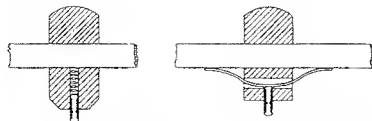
Sections of Two Sliders of a Better Type. In these the rounded end of a short rod is pressed against the wire by a coiled or flat spring.
